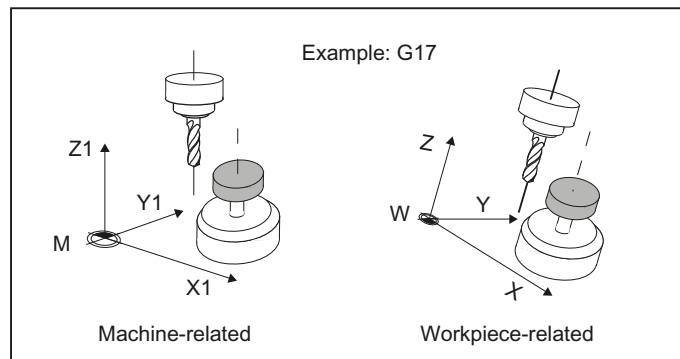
Parallel alignment of tool axis, probe axis and axis of the coordinate system
